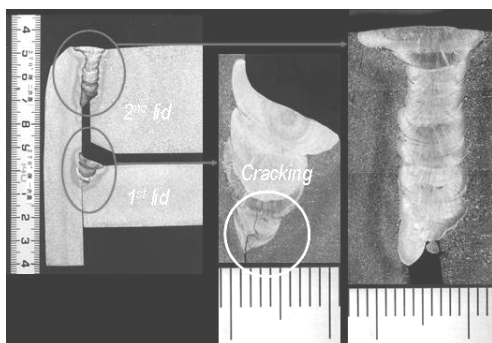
Magnified view of the cross section of the welded lid impacted in the horizontal drop test
